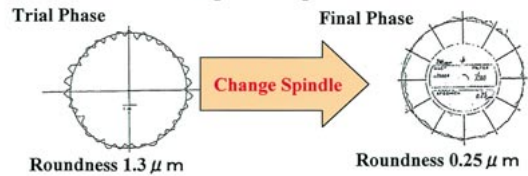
High aspect (L/D=8) punch manufacturing using tool grinding machine
